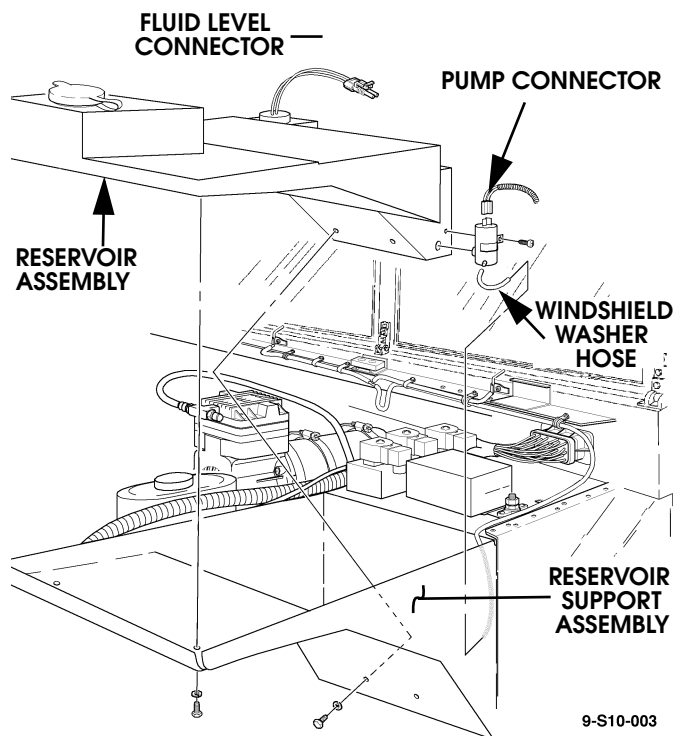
Windshield Washer Fluid Reservoir and Pump Replacement
